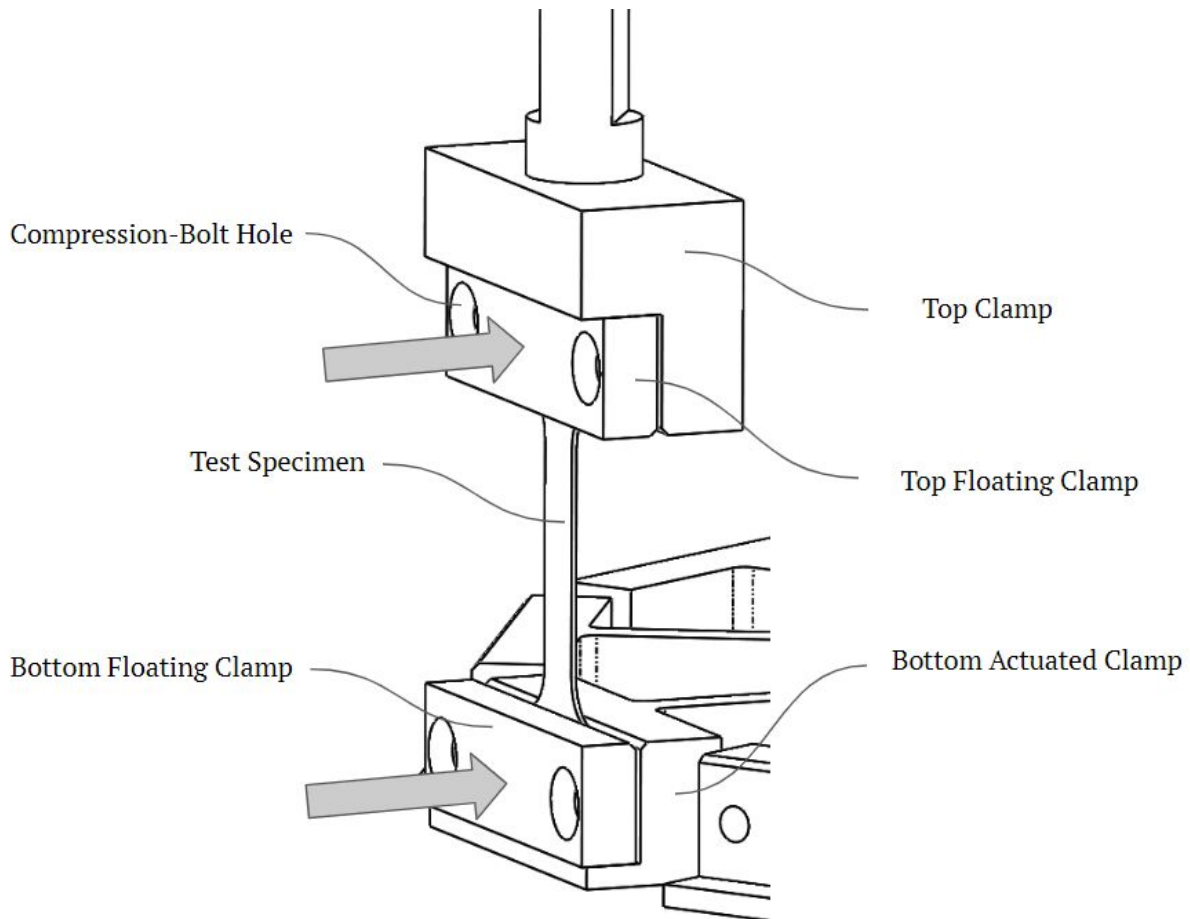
The test specimen clamping mechanism for both the sensor and actuated clamp.
